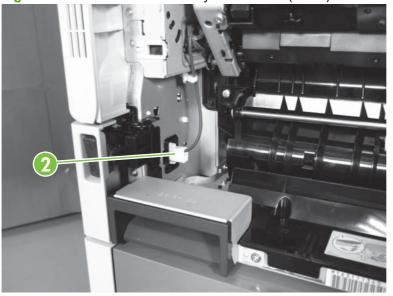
Remove the secondary transfer unit (3 of 9)
